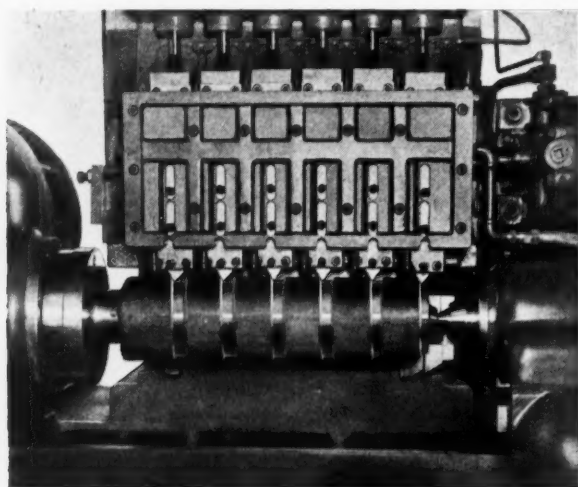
Close-up View of Work and Tools on Cross Shell-turning Lathe
